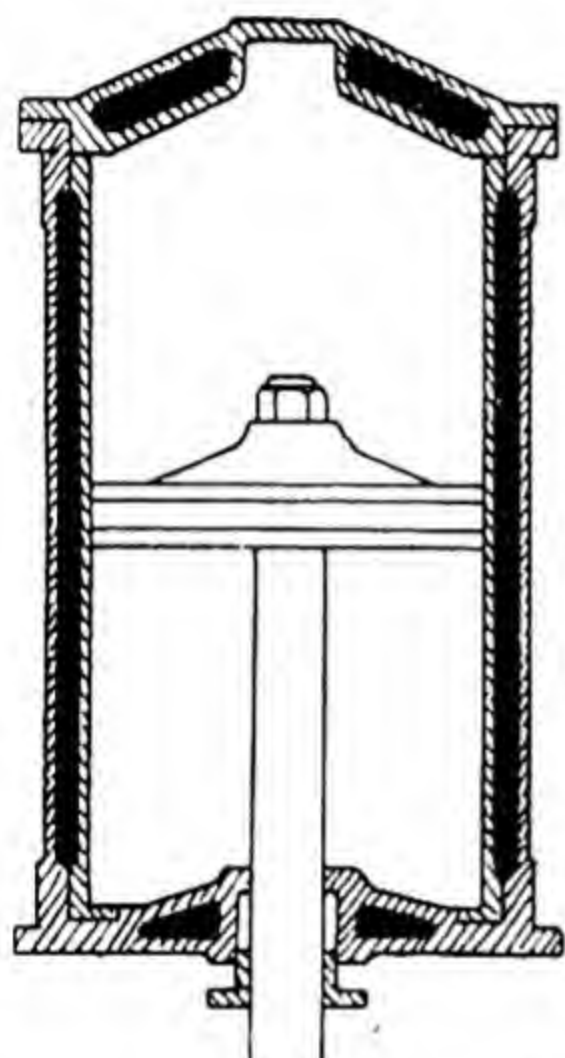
Section of a cylinder, steam-jacketed at the parts shown black.
